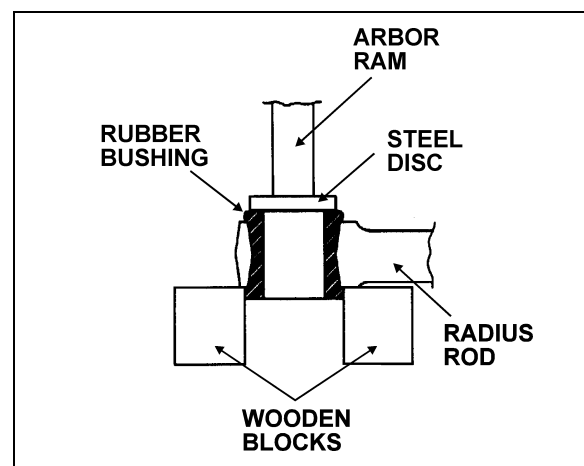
RADIUS ROD BUSHING REMOVAL
